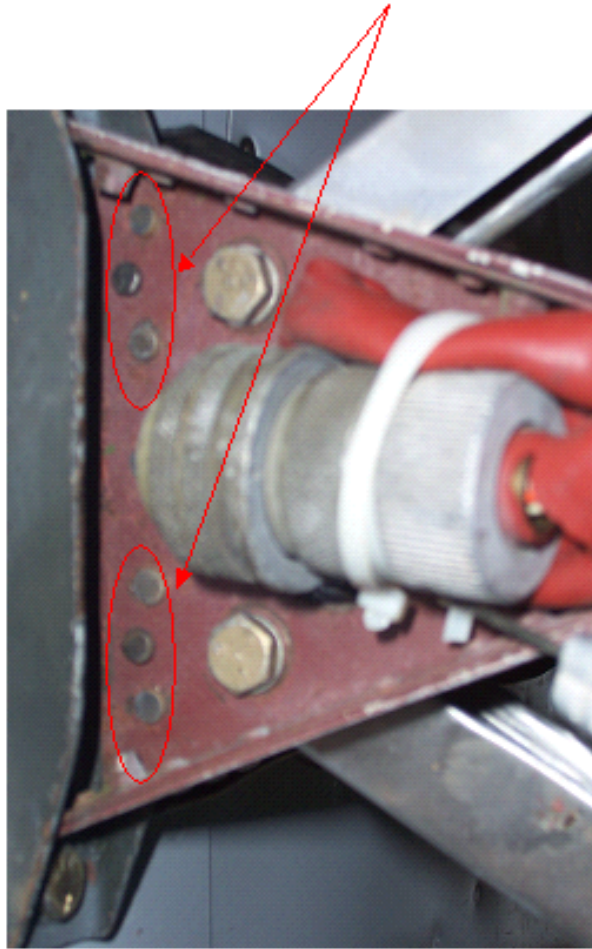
Location of Replaced Rivets in Pylon Assembly
